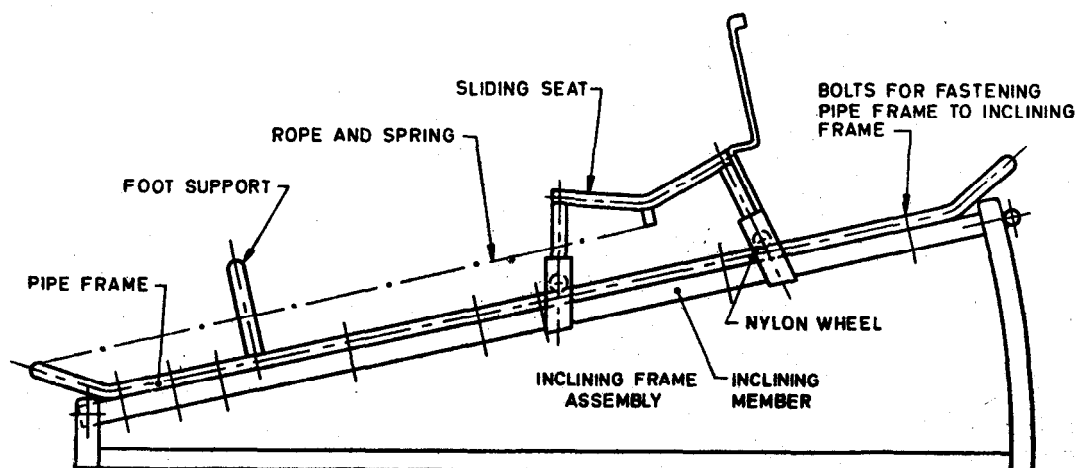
ASSEMBLY AND NOMENCLATURE OF SLIDING SEAT EXERCISER
